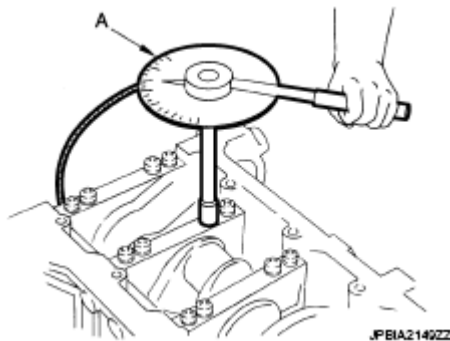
Tightening Main Bearing Cap Sub Bolts
